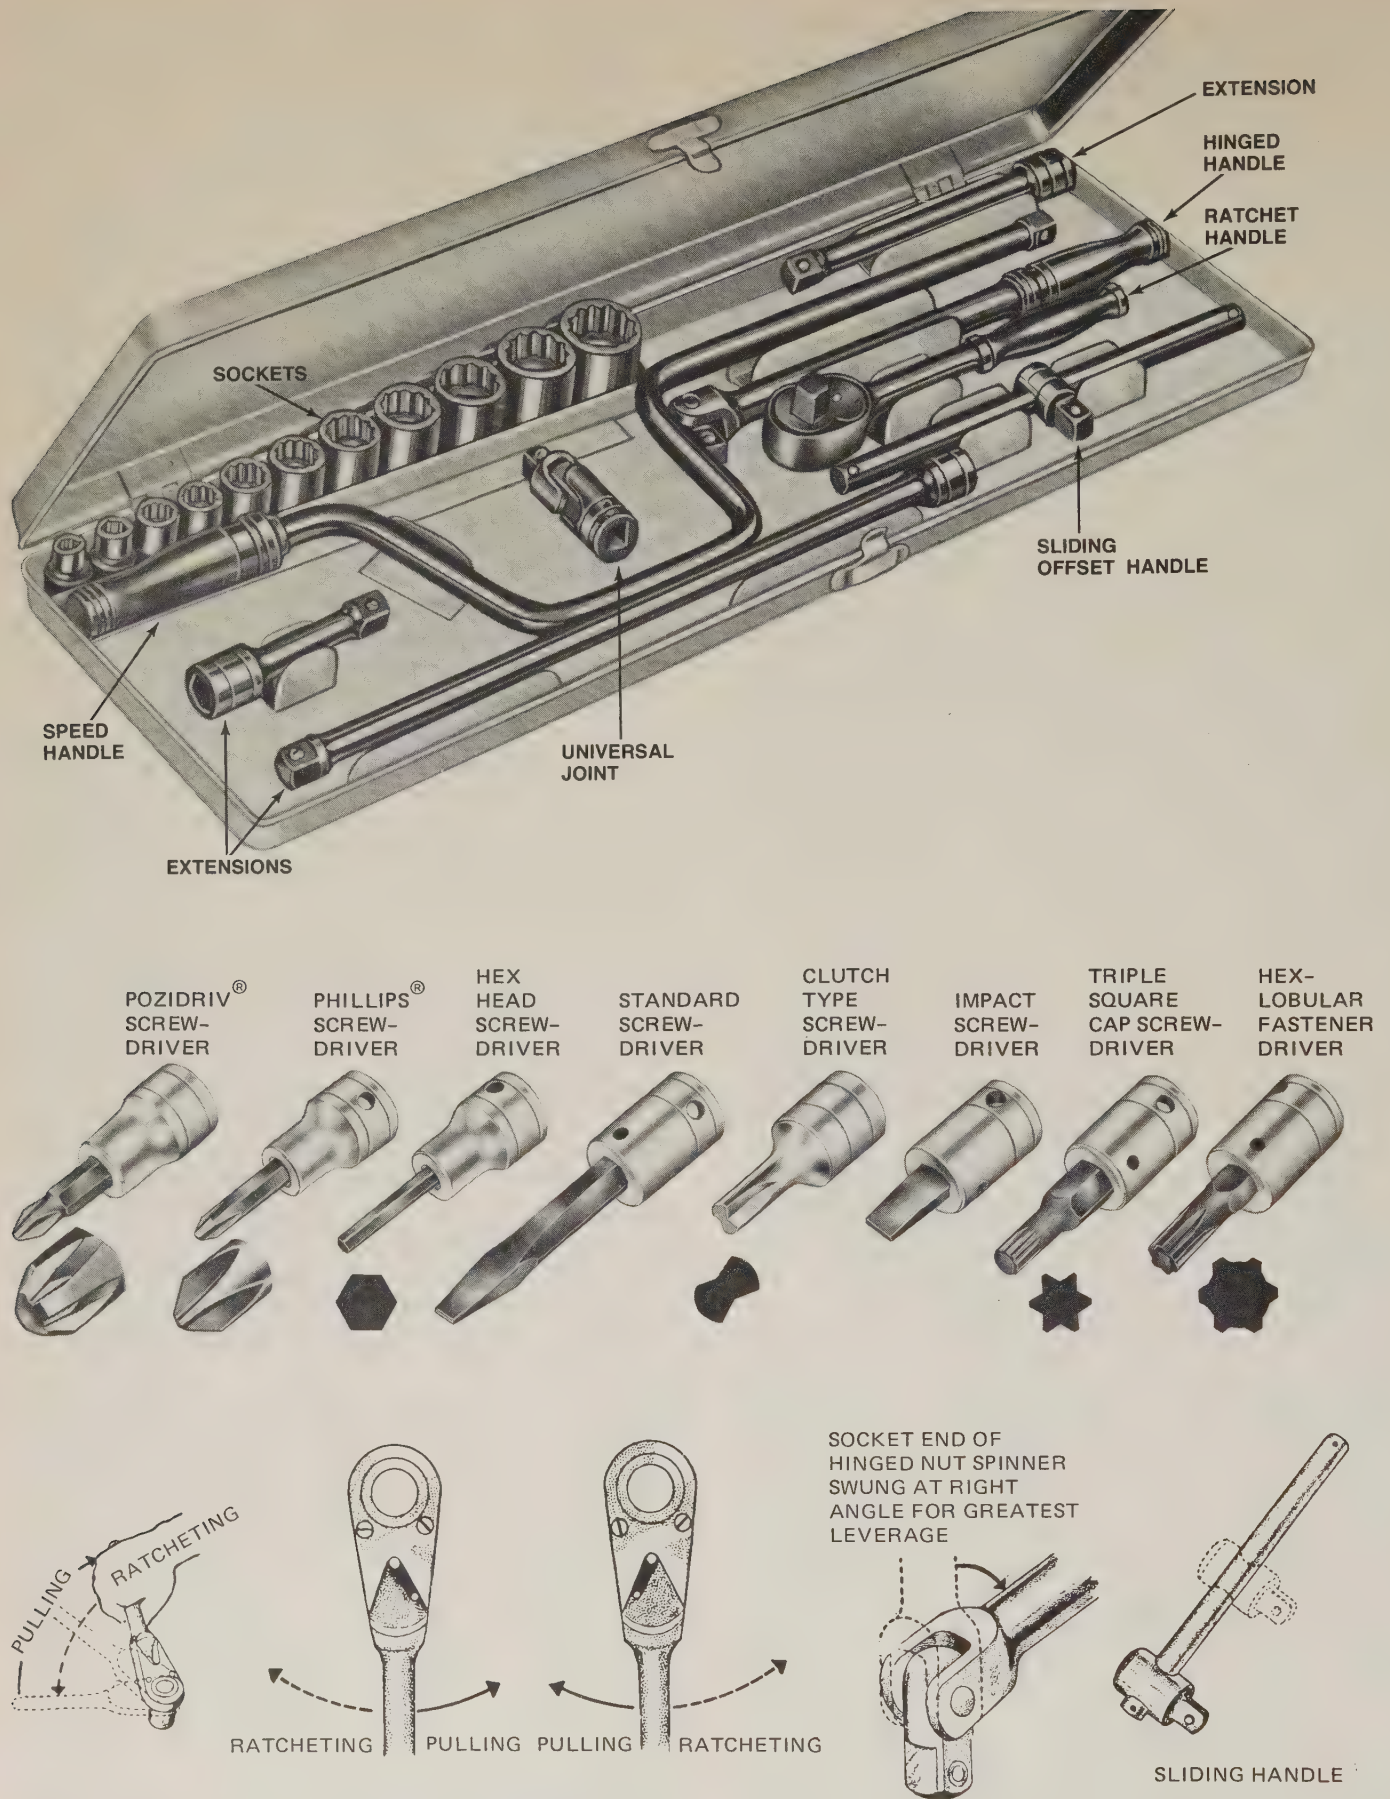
Set of sockets with handles, extensions, screw-drivers, and universal joints. (Snap-on Tools Corporation)
